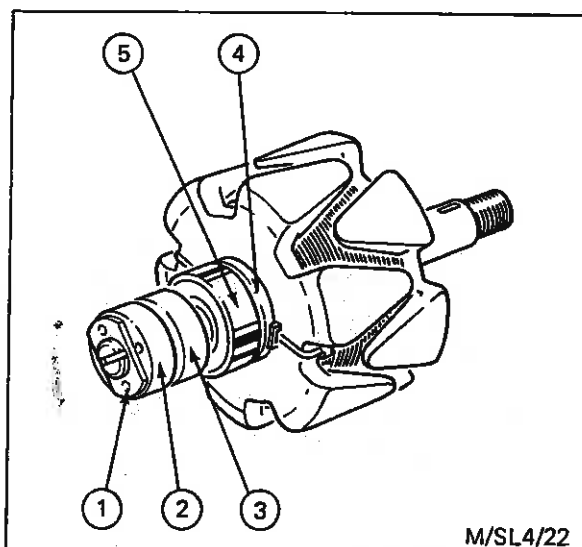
Slip Rings and Bearing Renewal - A115 and A133 Alternators
